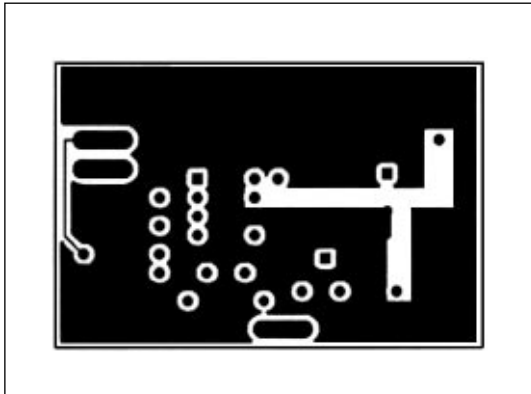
DIP PC Layout, Solder Side (1x Scale)
